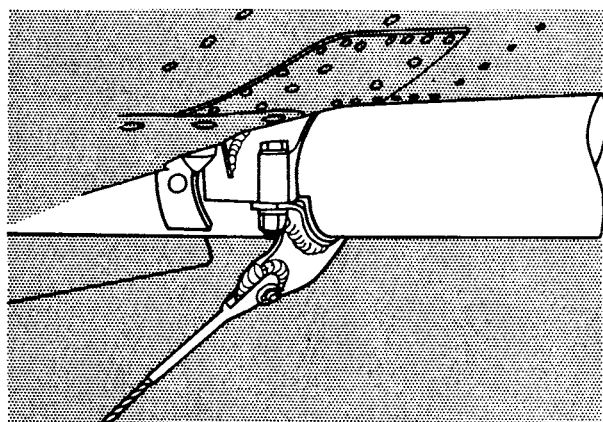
Typical cargo sling installation No. 3 (showing cable sling leg attachment to landing gear cross-tube fitting).
